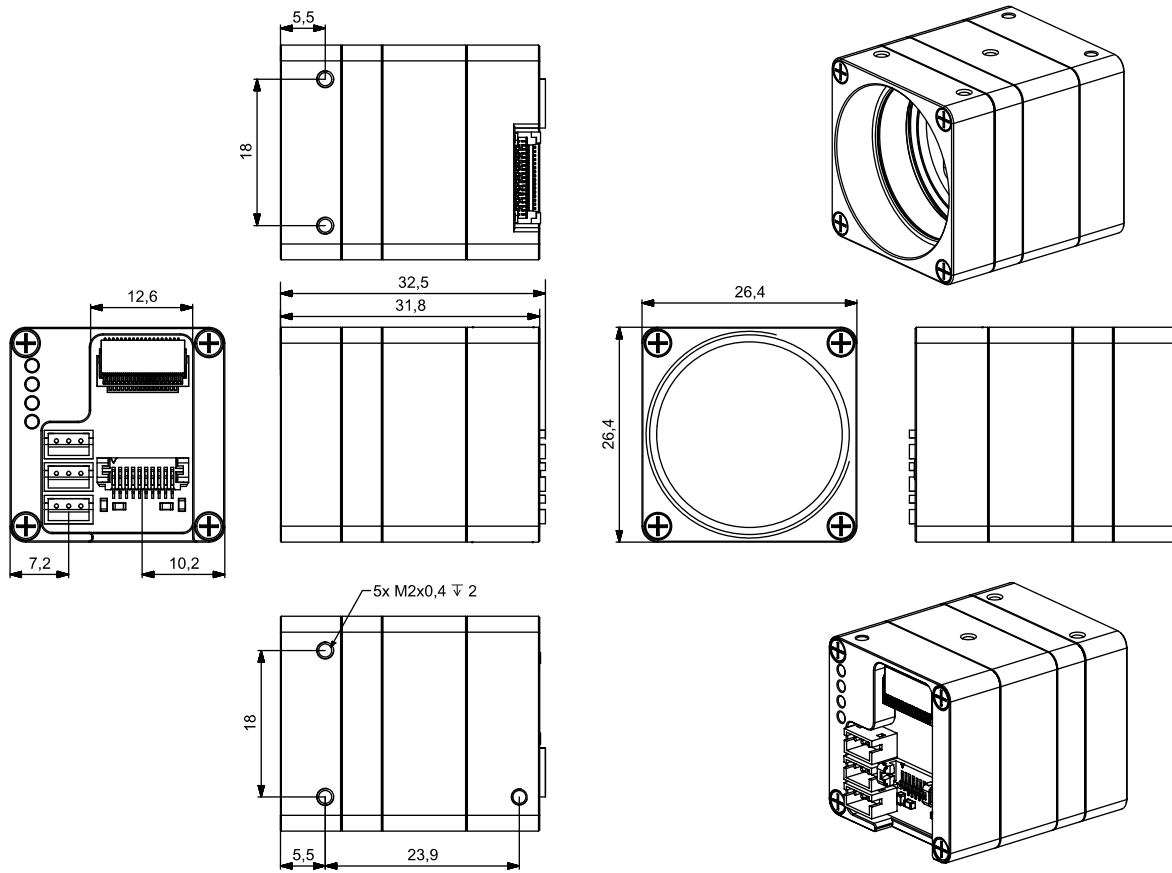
Dimensional drawing of MX031/050xG-SY-X2G2-FF (C-mount (with C-mount module B))
